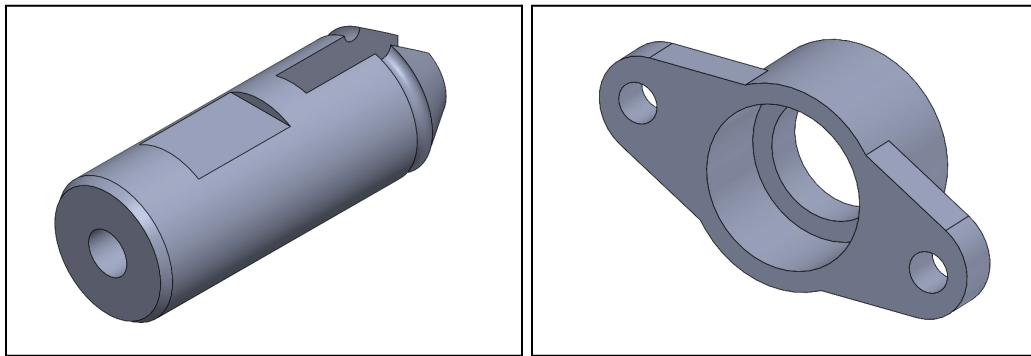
Wing lock peg (left) and wing lock anchor (right)
